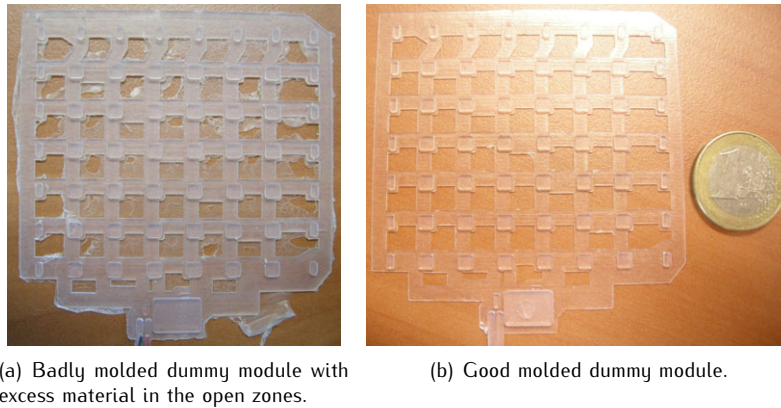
Pictures of a good and a bad dummy molded LED module.
